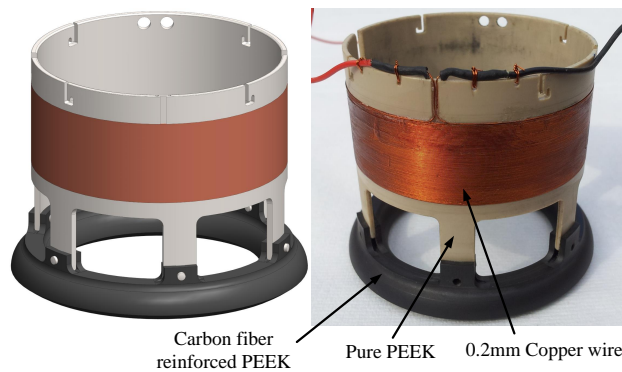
CAD model and picture of the valve plunger. The assembly pins are not inserted in the picture to the right.
